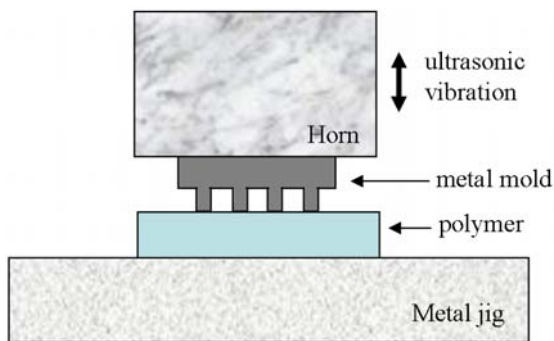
Schematic view of the polymer forming process using Ultrasonic welder
